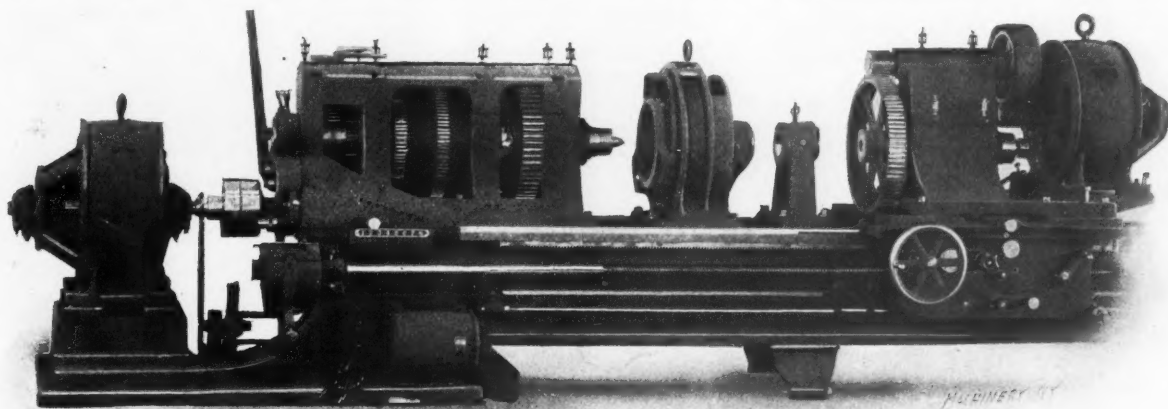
Lodge & Shipley Lathe with Special Attachment for Drilling Locomotive Axles
